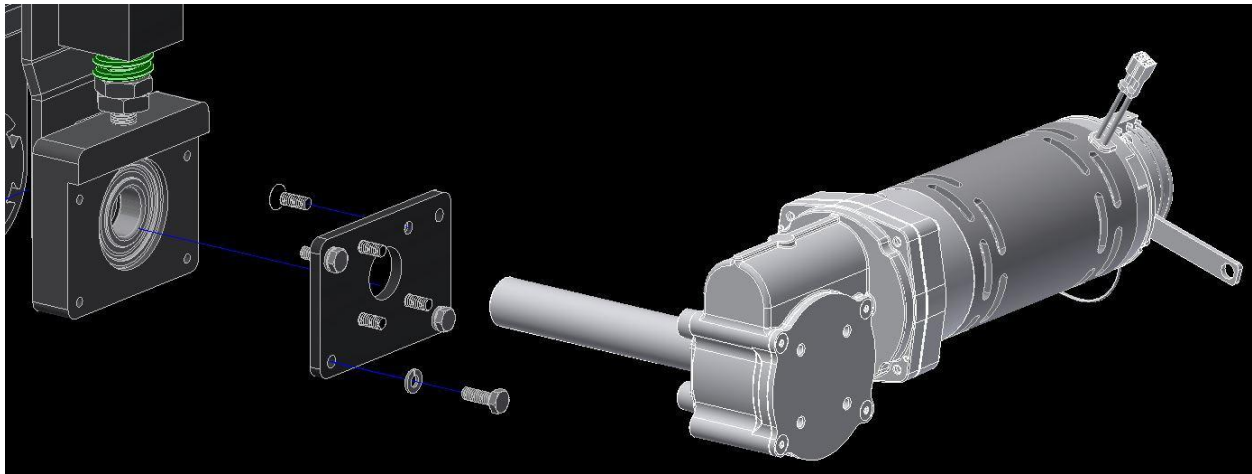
Bearing Block/Mounting Plate/Gearmotor Assembly
